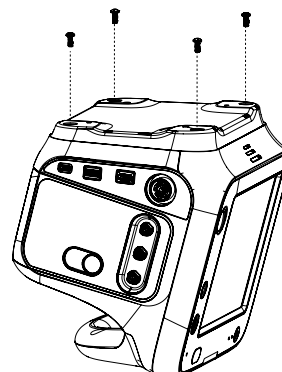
Bracket Pro Serie 27 – GR assembly parts
